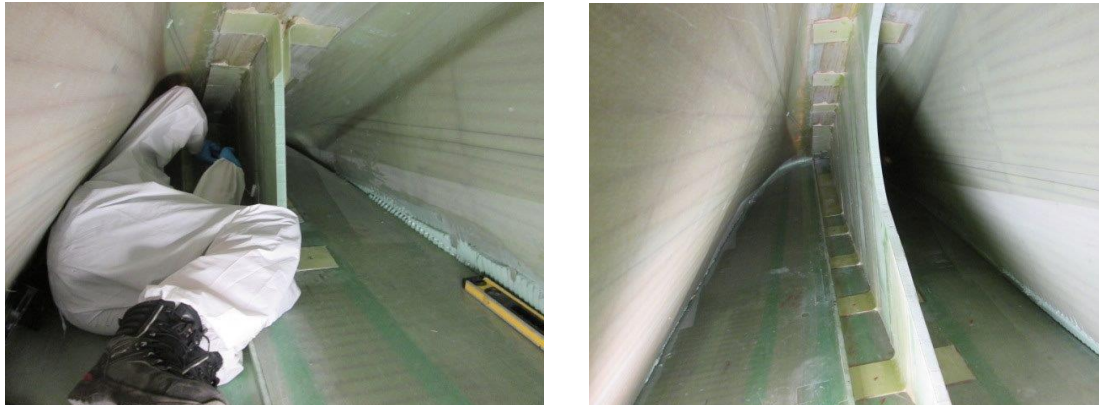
Floor installed in Root-Transition zone of a 15m section of aSSP34m blade.
